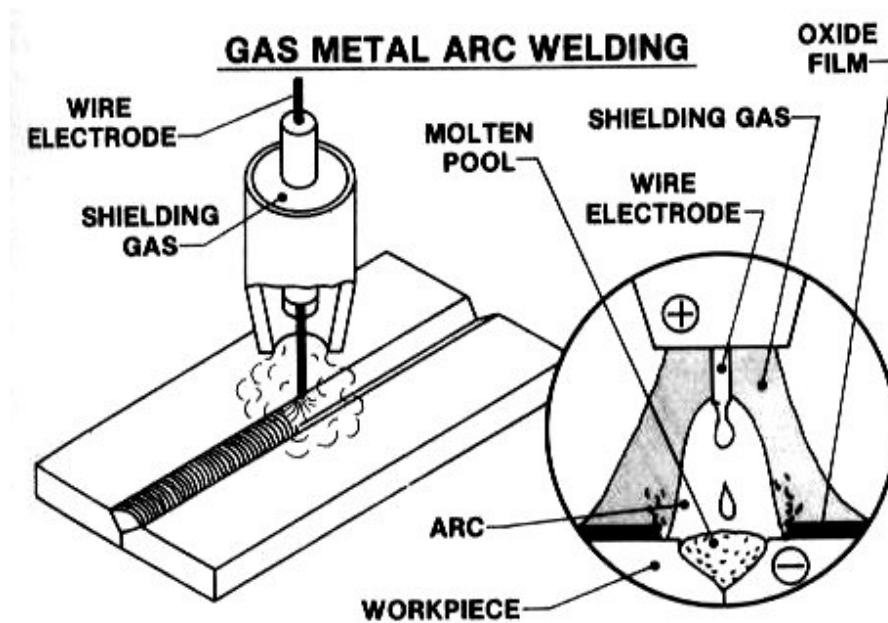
b: Gas Metal Arc Welding (GMAW)
